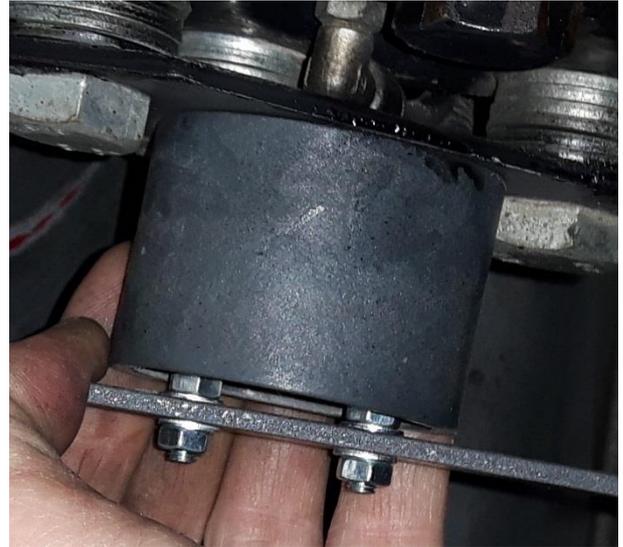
CENTRE AND FRICTION CHECK OF WHEEL ANGLE SENSOR.
